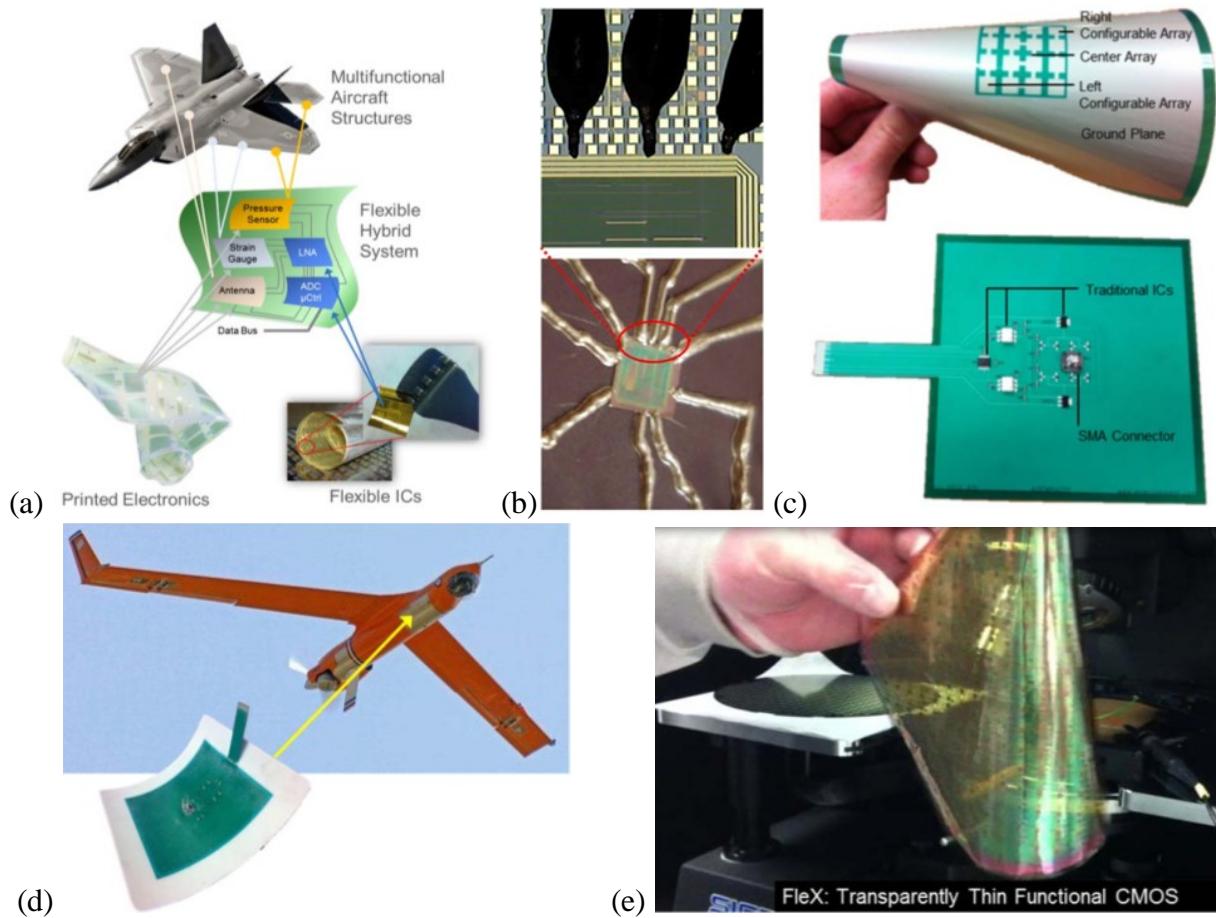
Wafer Thinning & Transfer Printing Examples [803, 790, 815]
